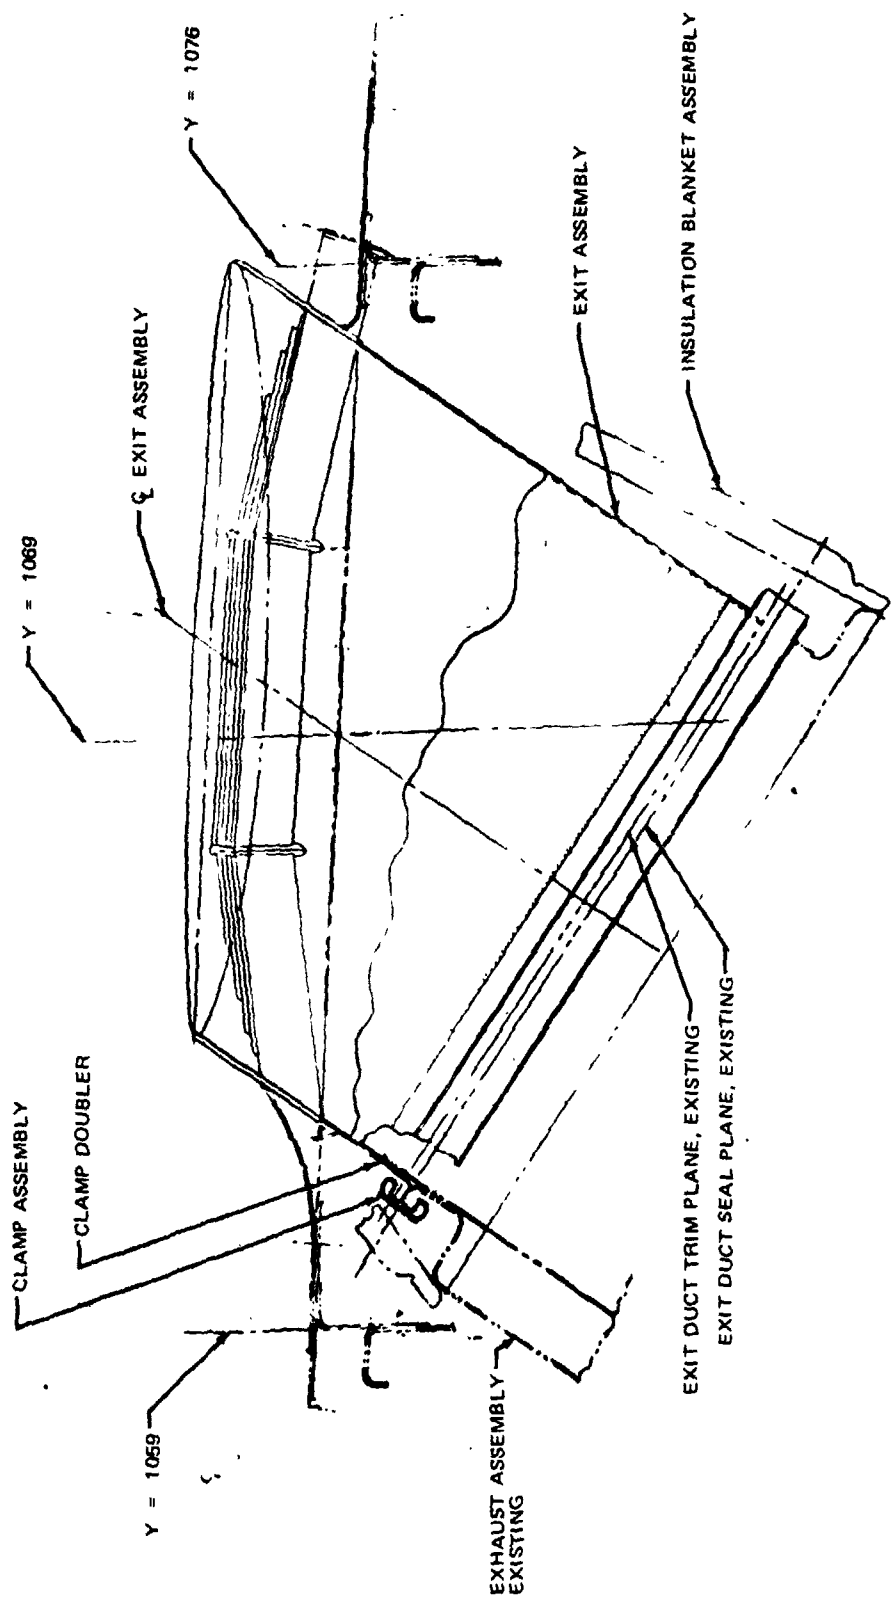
DC-9 REFAN - APU LOUVERED EXHAUST - PLAN VIEW
